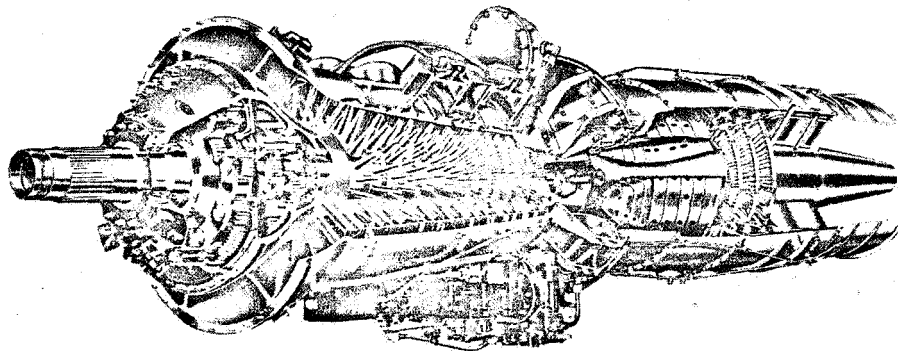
Cutaway views of typical gas-turbine engines.
